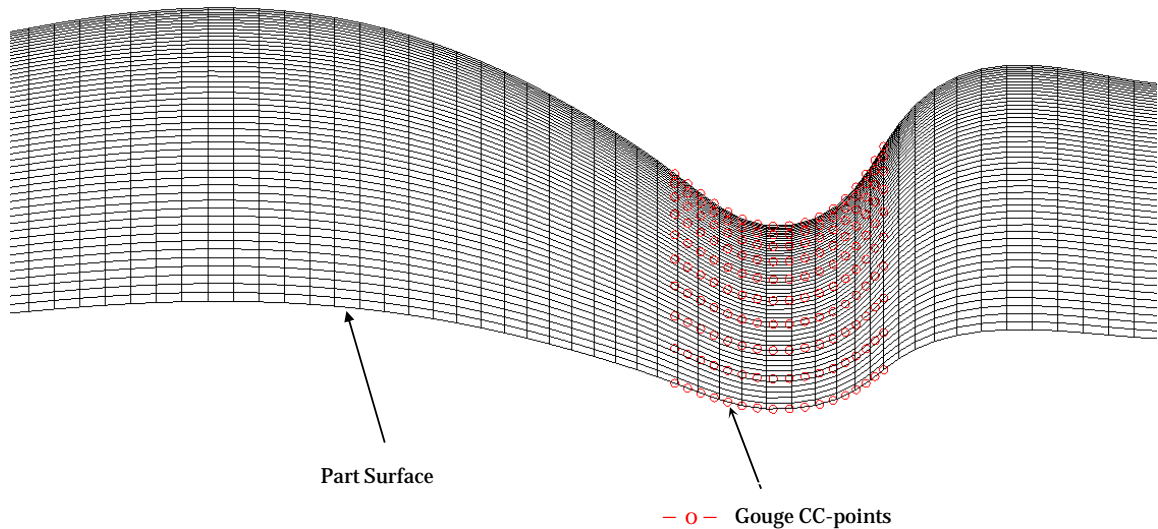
Gouge CC-points when using ball end mill cutter of radius 0.5 inch.
